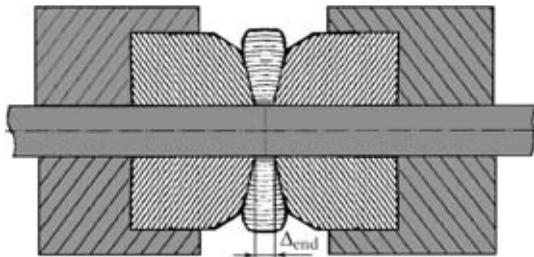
Scheme of formation of welded joint with end gap Δ_{end}
